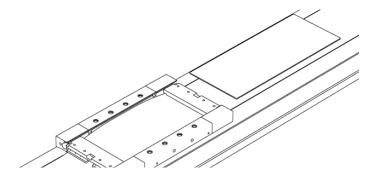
Disassembly/Assembly of cover strip deflection
